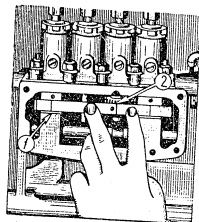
Installing Fuel Pump Sections by the Marks:
